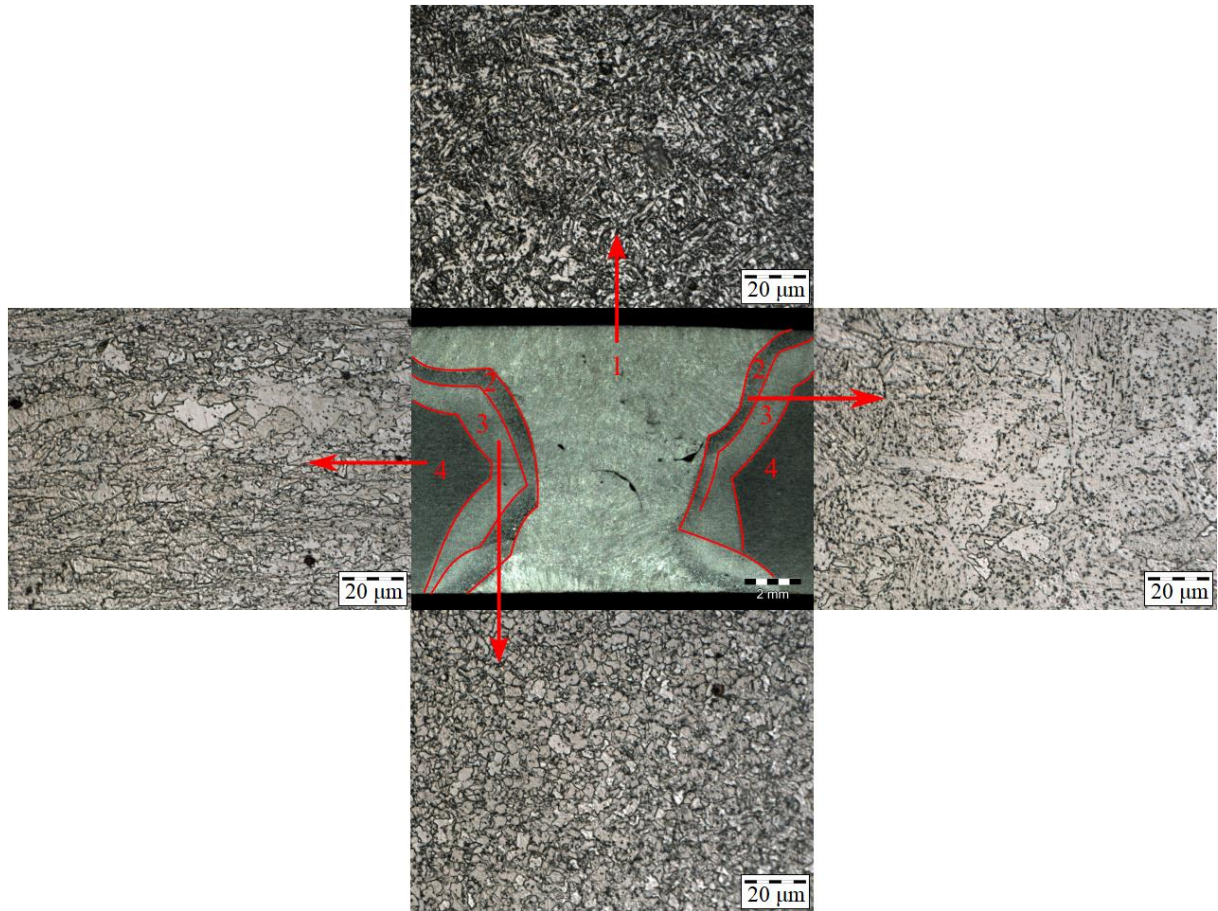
The cross-sectional macro photo and microstructures of Strenx 700MC weld joints, 1) welding pool, 2) grain coarsening zone, 3) grain refinement zone and 4) base metal
